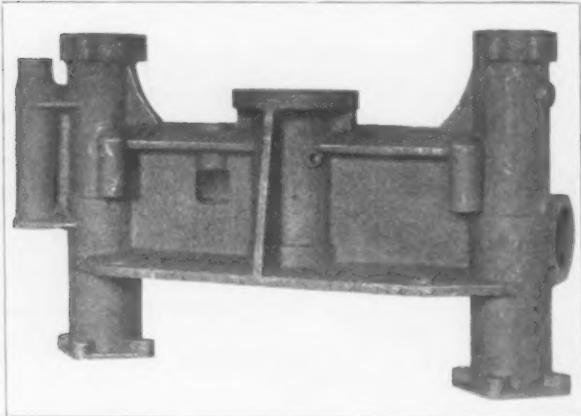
Casting Designed to Eliminate Unnecessary Machining
